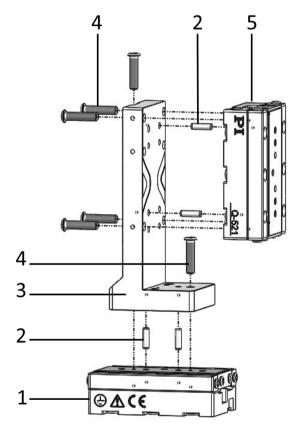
Example: Building an XZ system consisting of two Q-521.240 and a Q-121.20U adapter bracket
